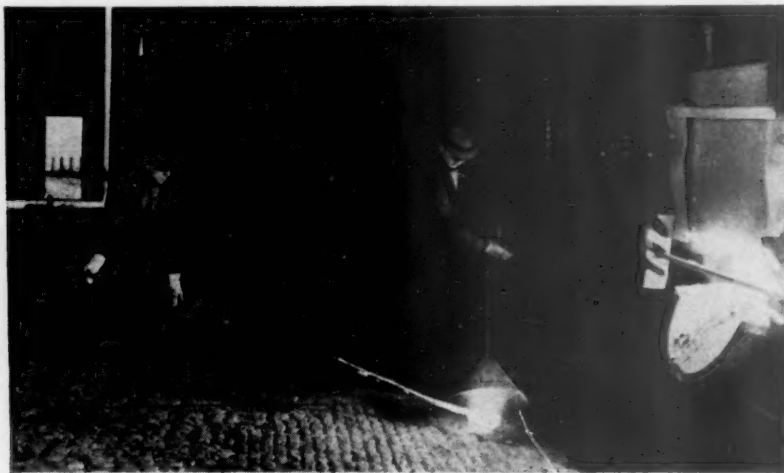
SAMPLING STEEL WITH A GAS TUBE.
